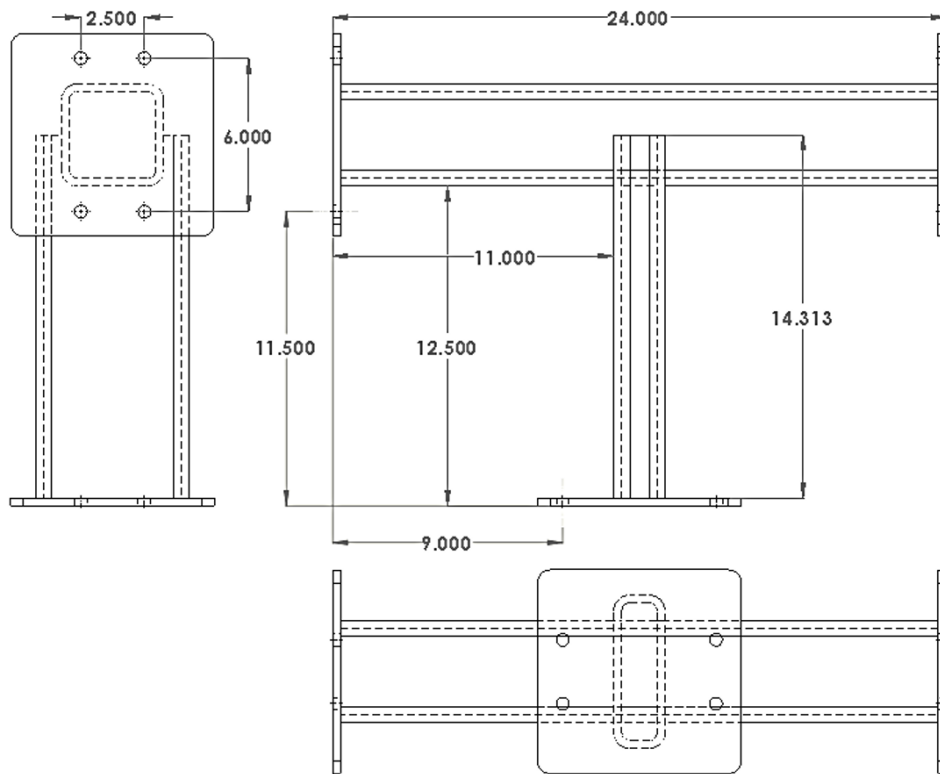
1: Dimensions of the Complex tubular welded joint subjected to torsion and bending cyclic loading (all dimensions are in inches)
